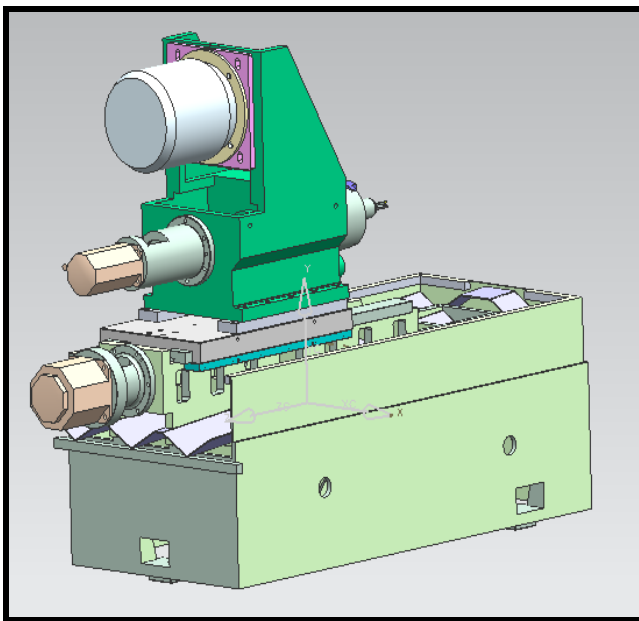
3-D CAD Model of Special Purpose Machine Bed
